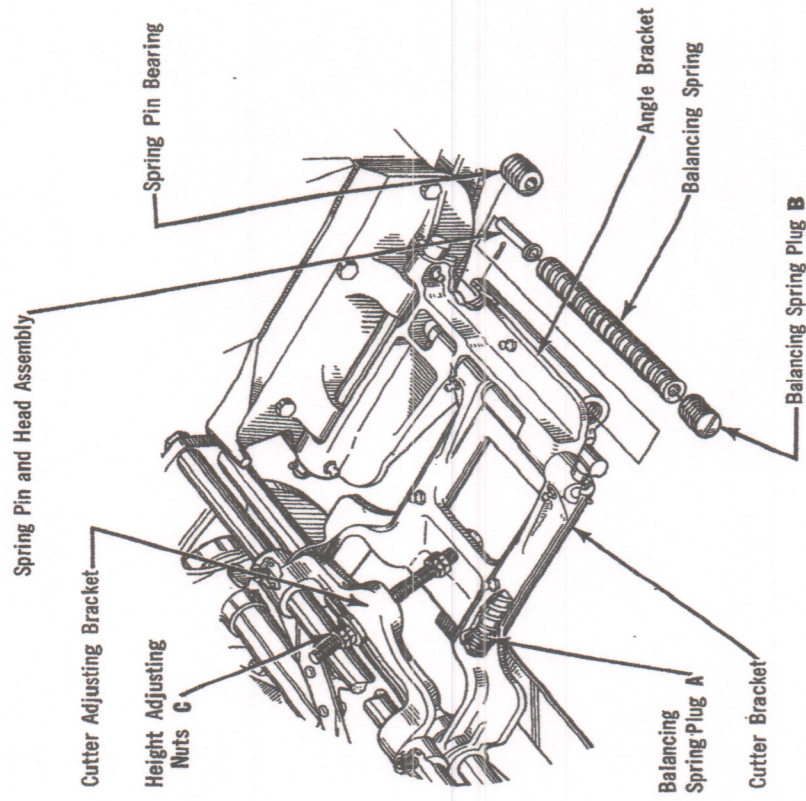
Counterbalancing Adjustment for Side Cutting Units.
